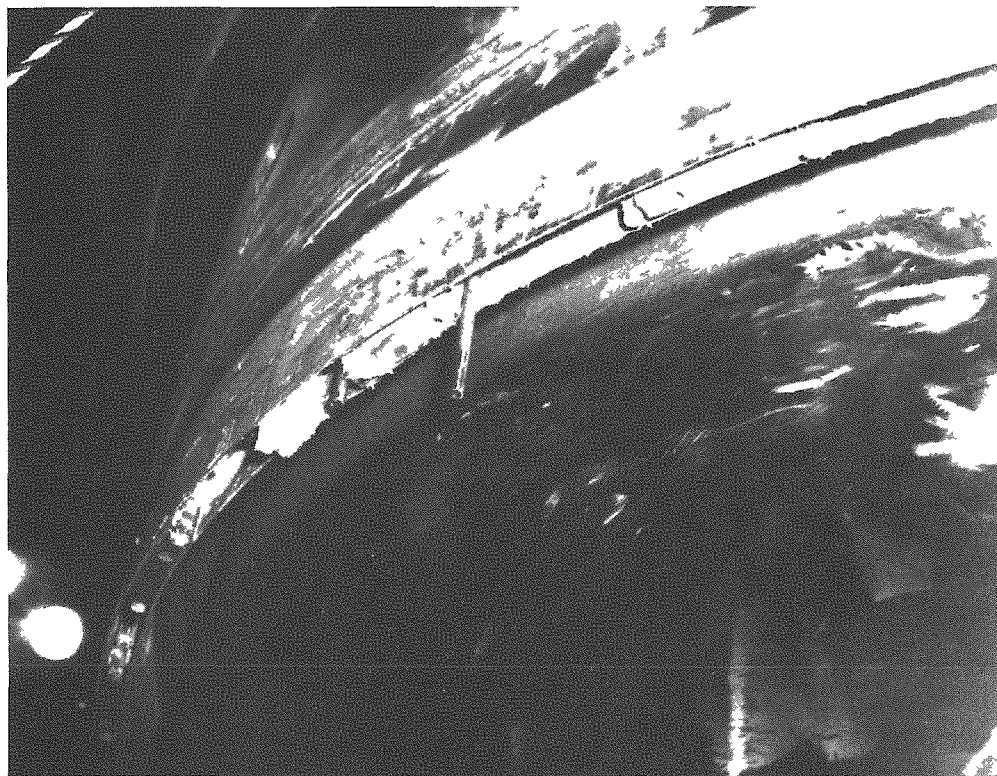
View of Large Rotating Plug Seal Blade after Plug Removal
